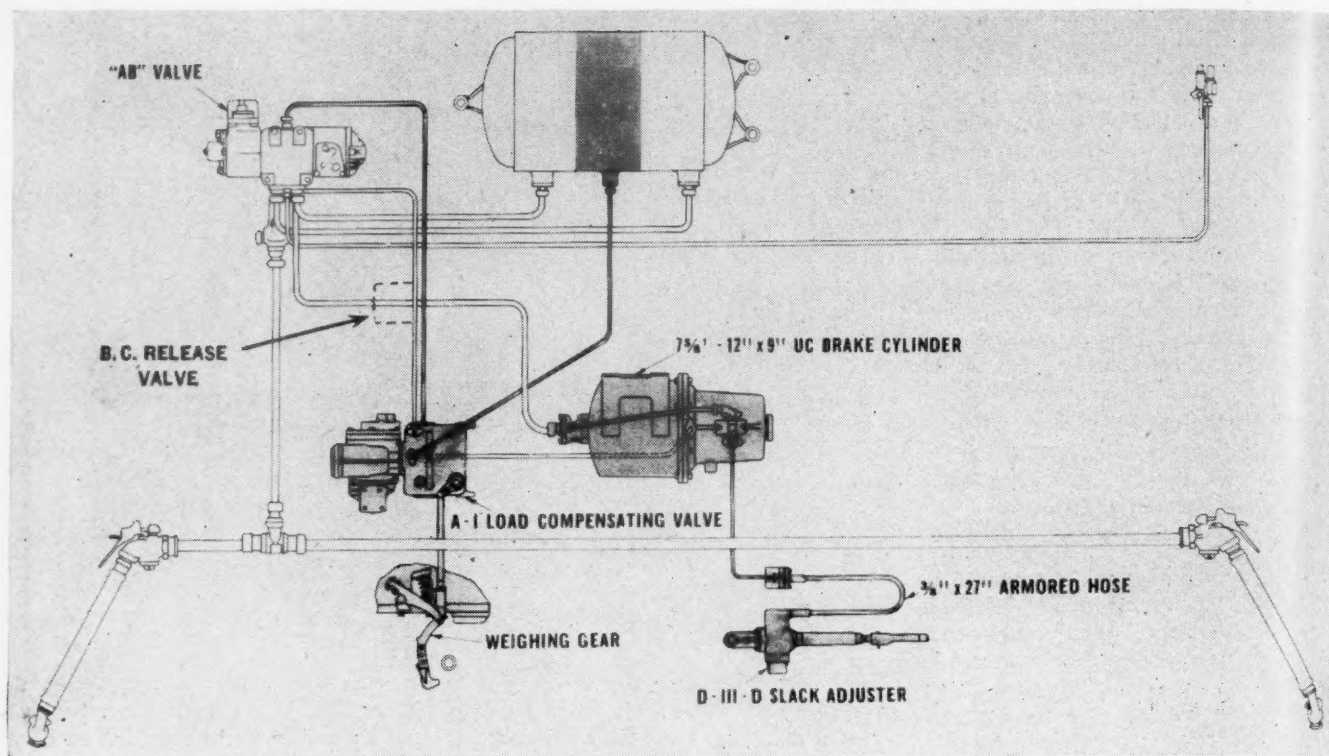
Piping diagram of the complete Load Compensating Brake equipment
